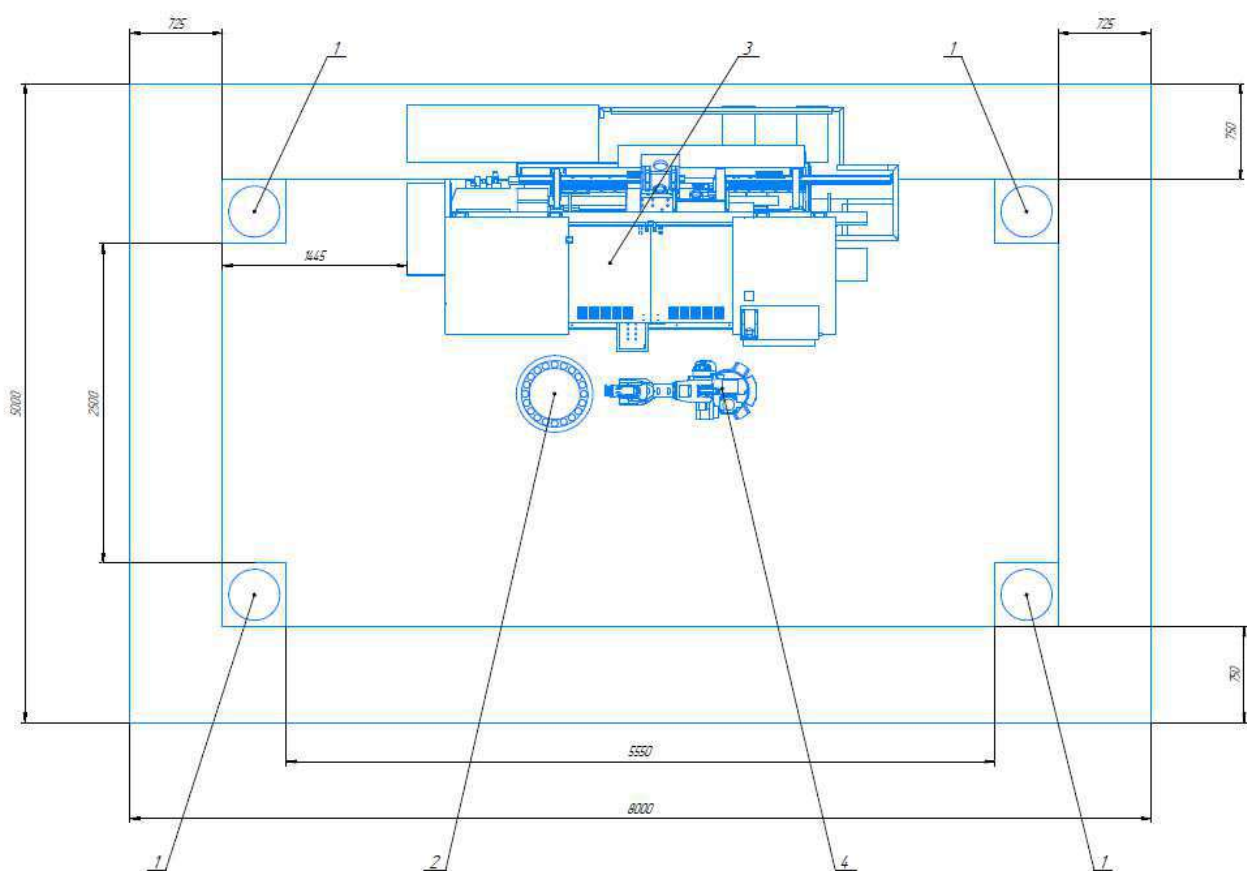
Sketch of the layout of a robotic complex for the manufacture of parts for construction
